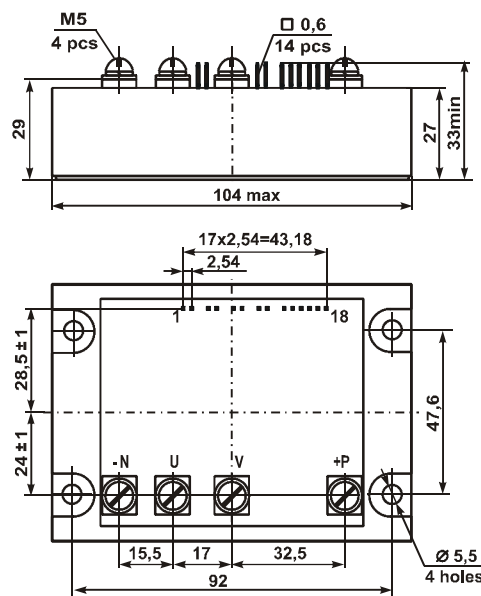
Overall drawing of modules M13B-30(50,90)-6(12)
